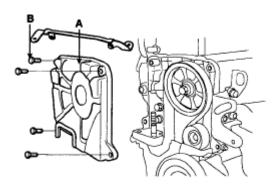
Identifying Crankshaft Pulley Courtesy of HYUNDAI MOTOR CO.
